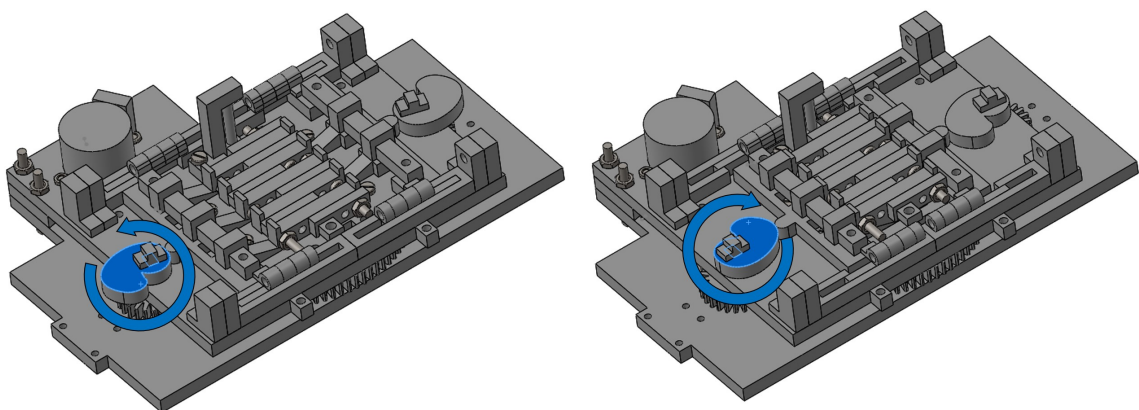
CAD Design of z-axis mechanism. Note the selected surface in blue indicating the moving part
